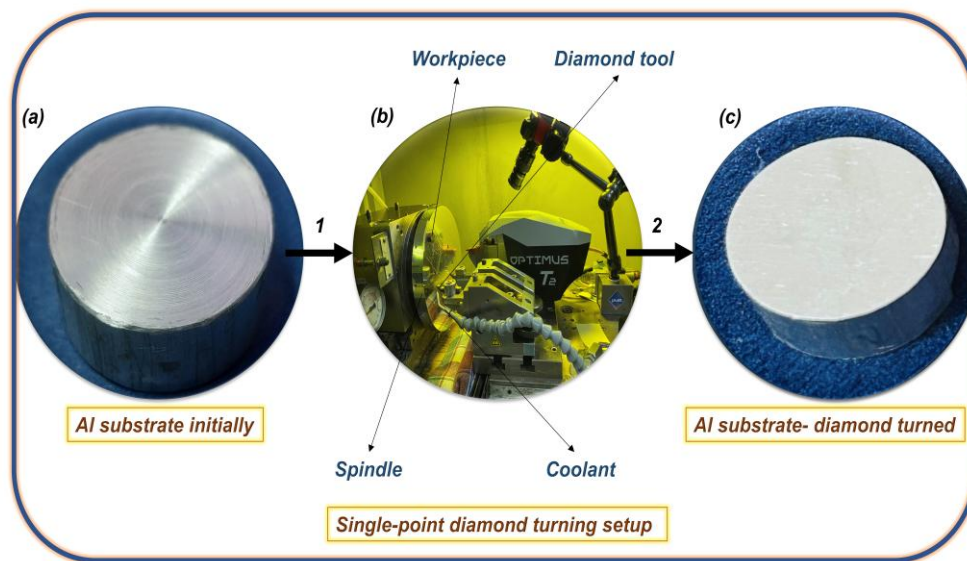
Schematic view of the systematic fabrication of a rectangular pillared textured surface using SPDT machine.
